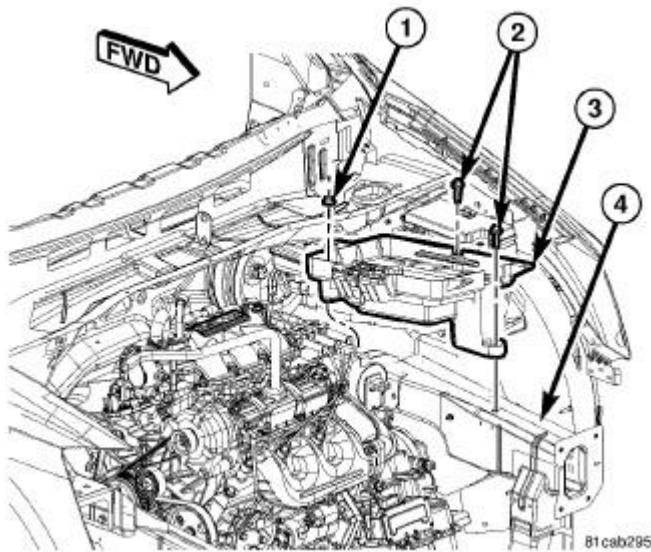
Identifying Bolts, Nut, Battery Tray And Frame Rail
